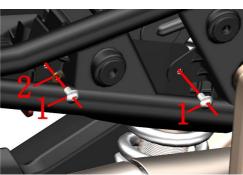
REAR COVER COMPONENT		Electrical device box component 1	СНК
